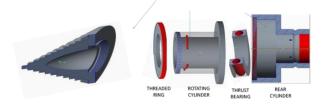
Nozzle components- cutter, threaded ring, rotating cylinder, thrust bearing, rear cylinder
